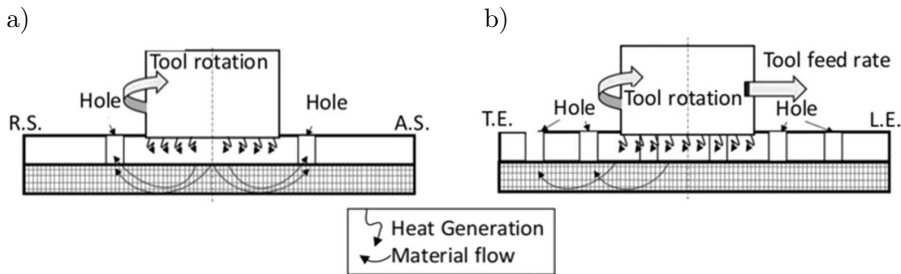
Heat generation and material flow [30]: a) transverse section, b) longitudinal section.
